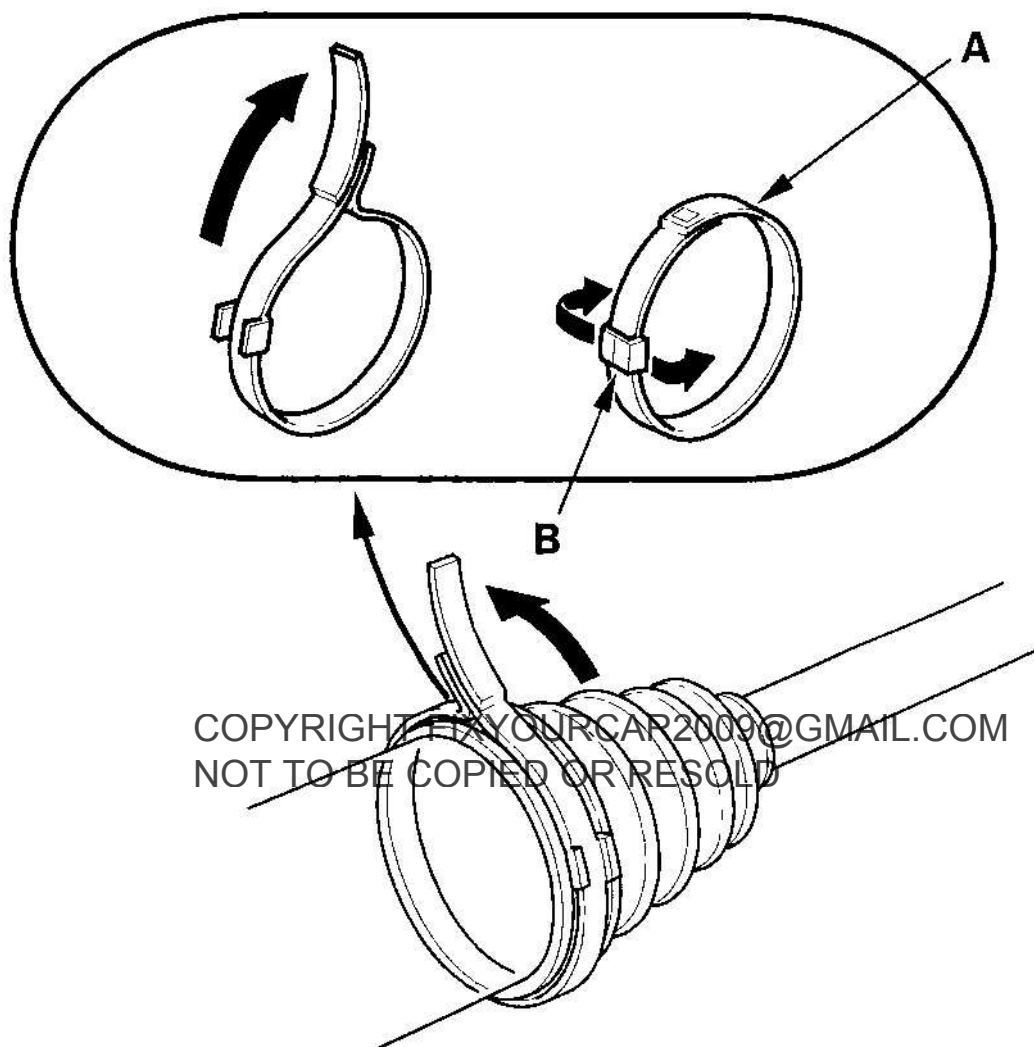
Removing Inboard Boot And Locking Tab Type Boot Band
